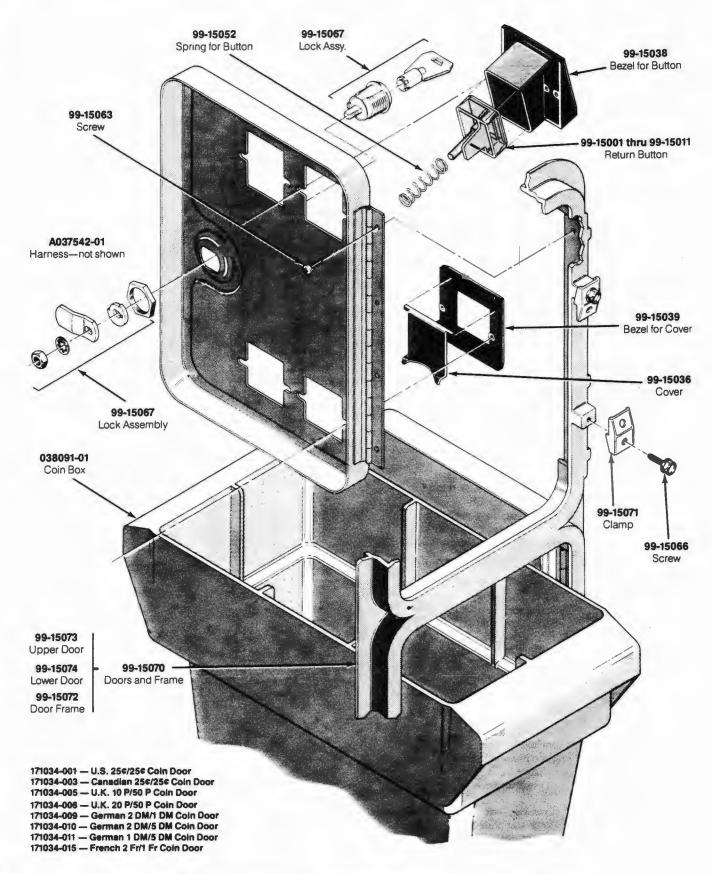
Coin Controls, Inc. Coin Door Assembly, continued 171034-xxx A
